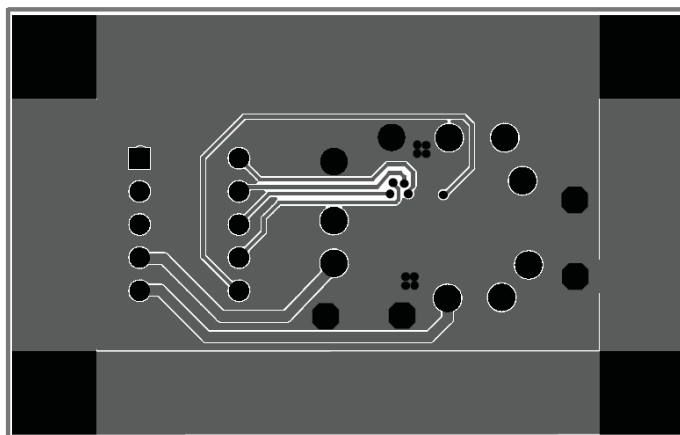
AAT2605 Evaluation Board Bottom Side Layout.
